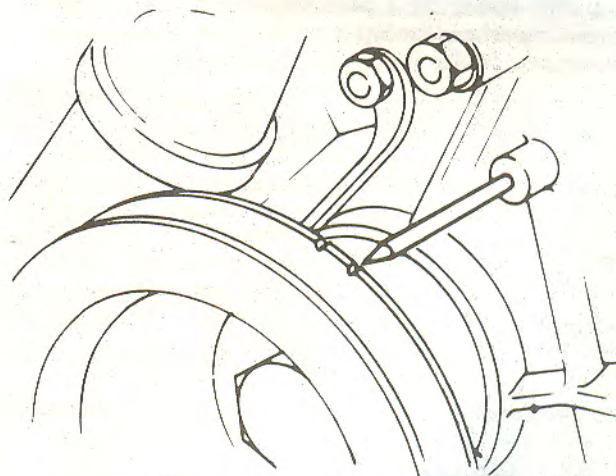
The pointer on the timing cover and the two notches in the crankshaft pulley.
